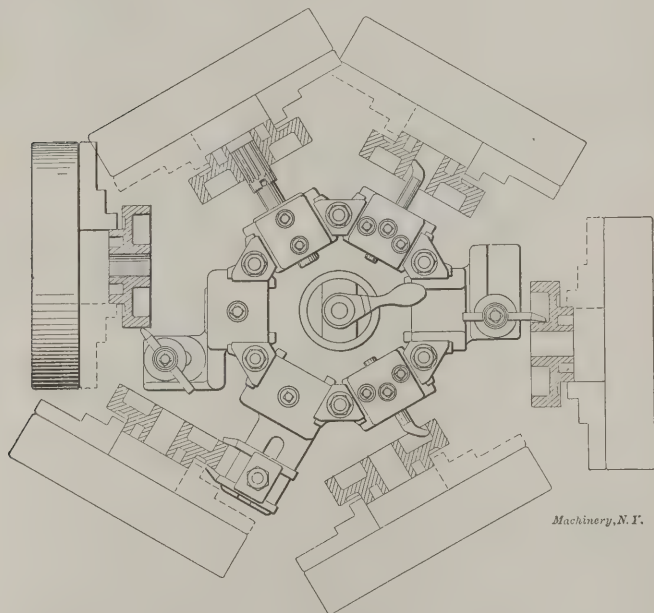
Typical Layout of Operations for Finishing a Casting.
